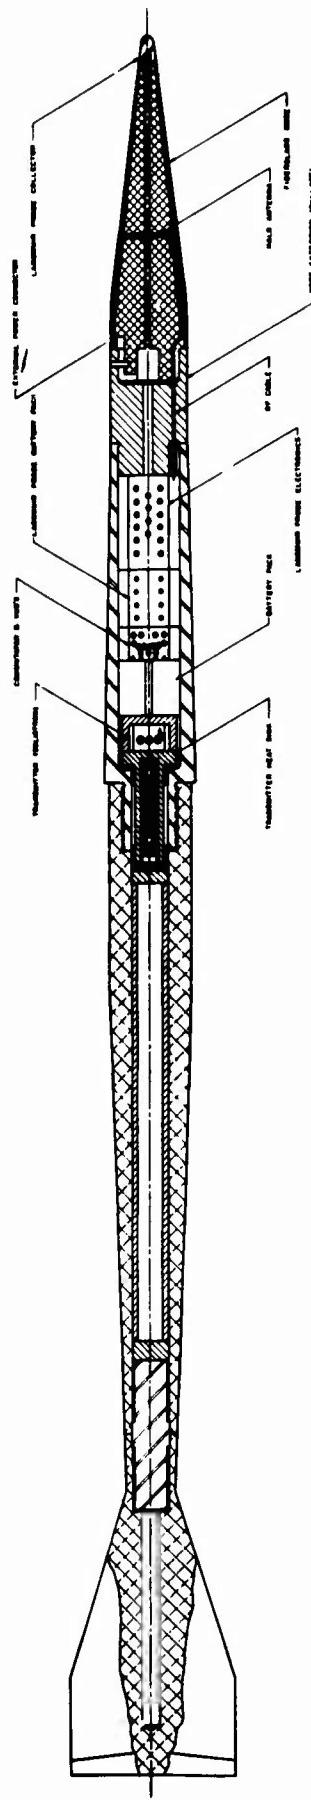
Mechanical layout 7-inch Langmuir probe payload
